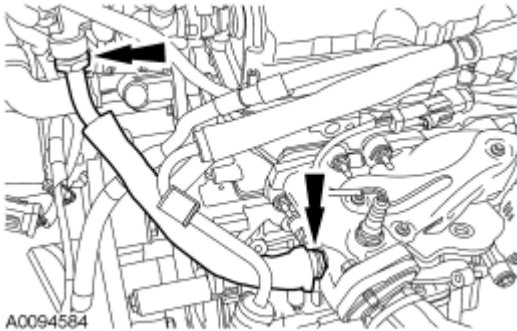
Locating Exhaust Gas Recirculation (EGR) System Module Tube
